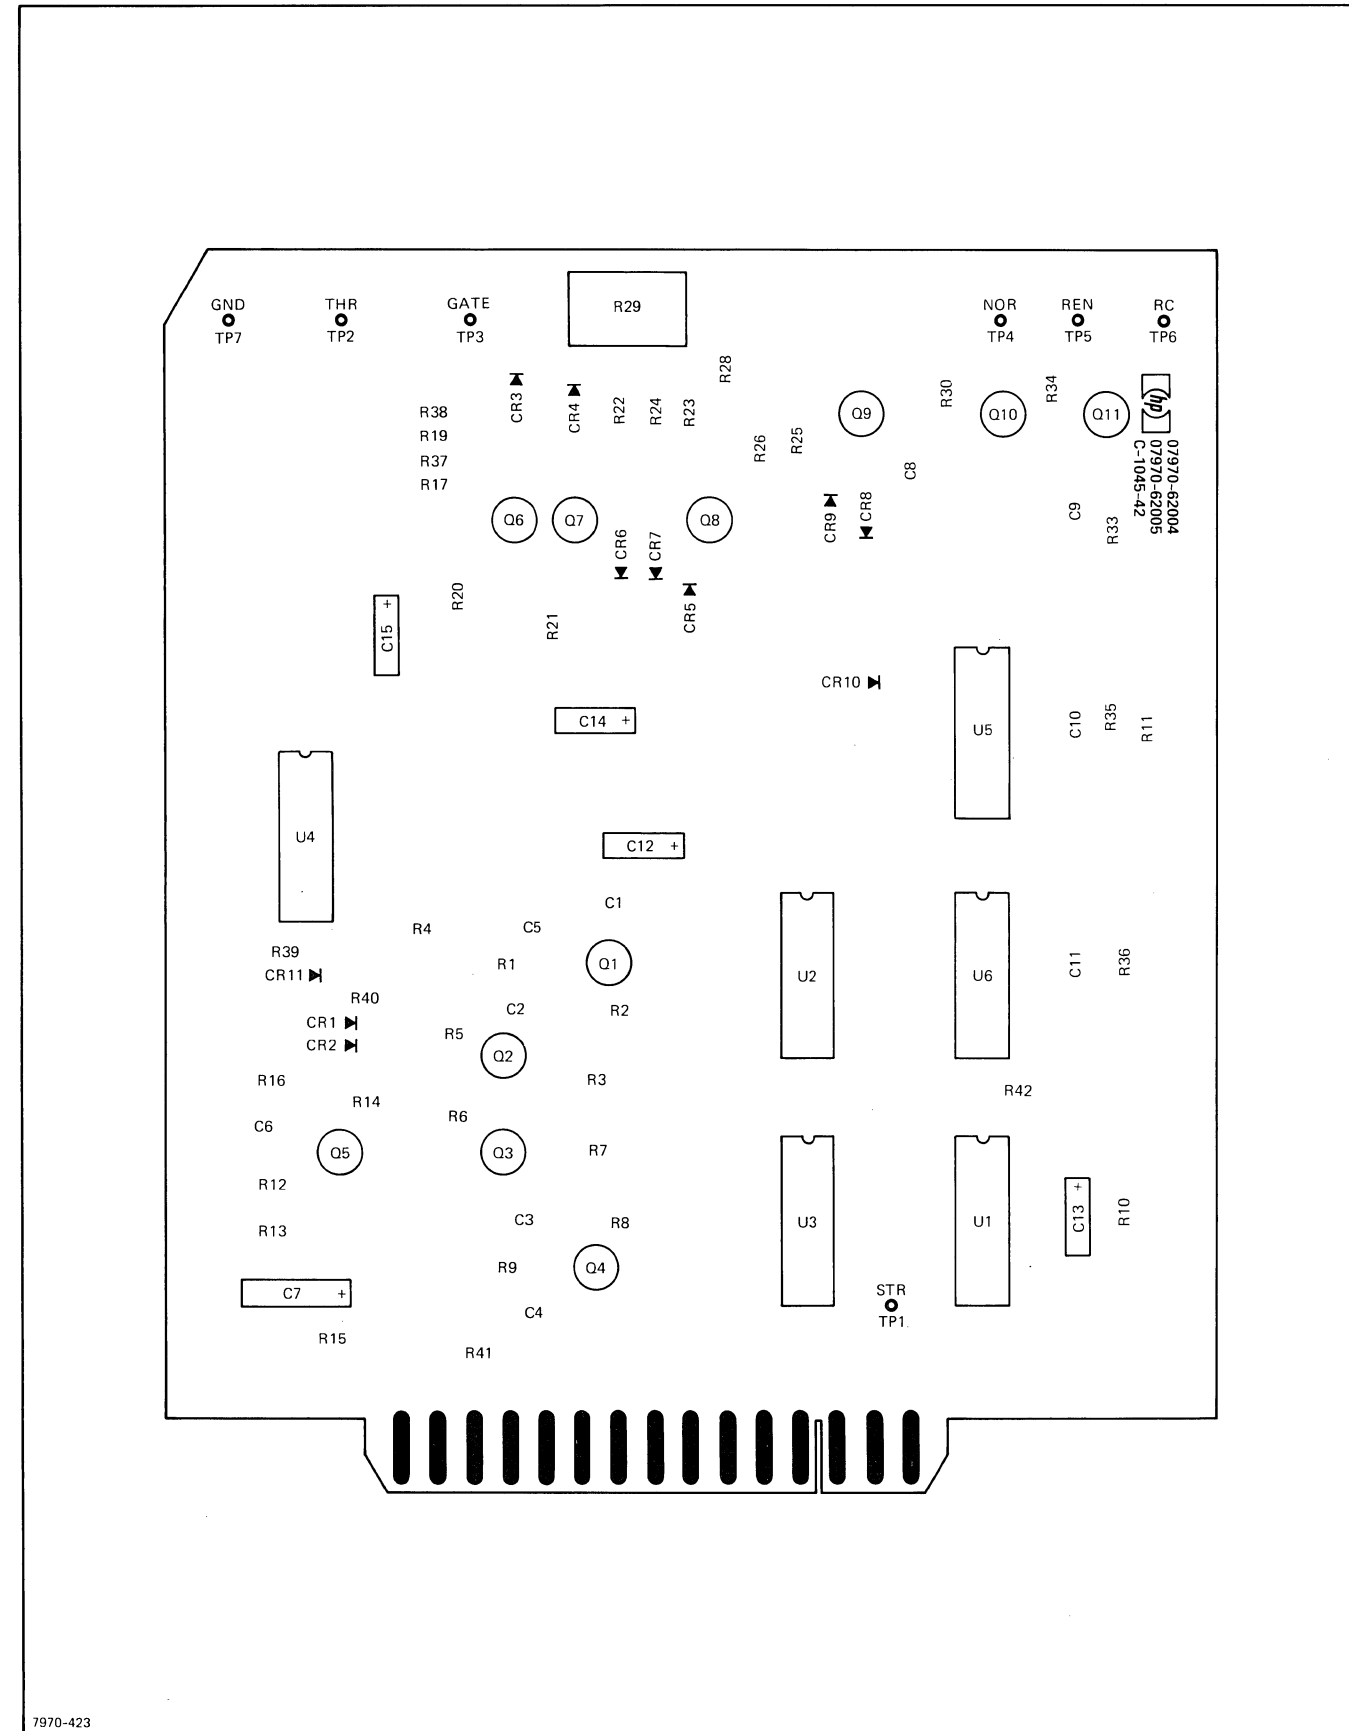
Read/Read Control PC Assembly A18A1, Parts Location Diagram
